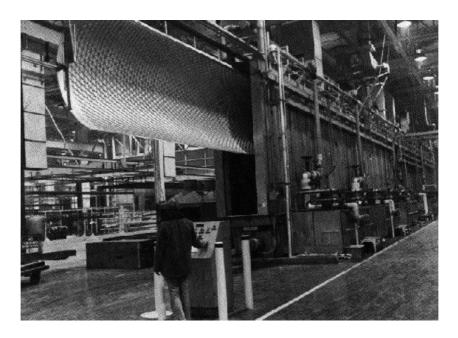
Automated aerospace penetrant spray processing and inspection system.
